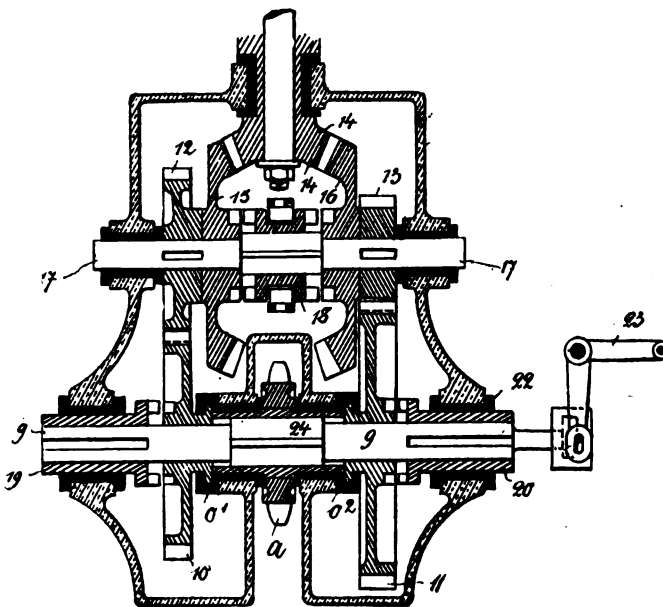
SECTION OF "PROTOS" VARIABLE SPEED GEAR.
